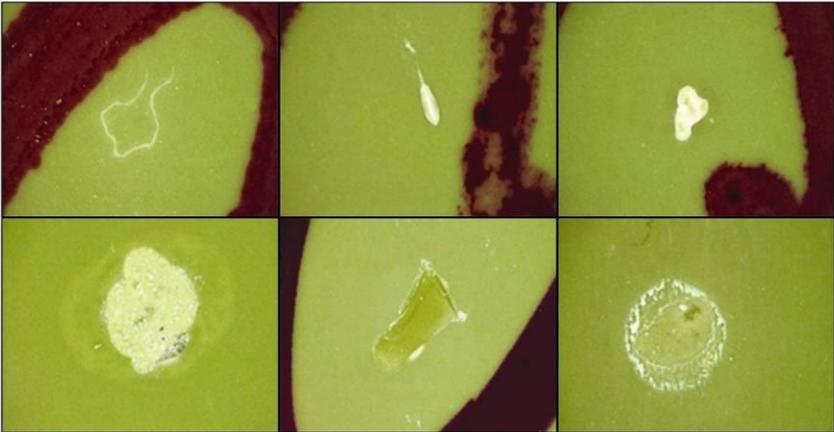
Flaws found in the post-sintering inspection of fuel cell components
